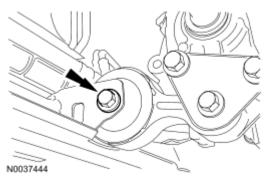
Locating Engine Roll Restrictor Bolt Courtesy of FORD MOTOR CO.
